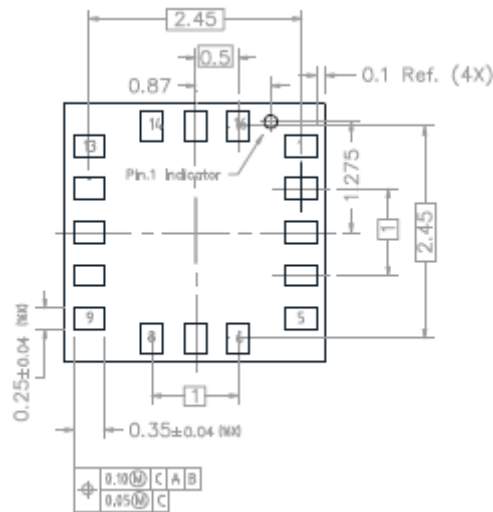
LIS3DH bottom view of package (dimensions in mm) [2]
